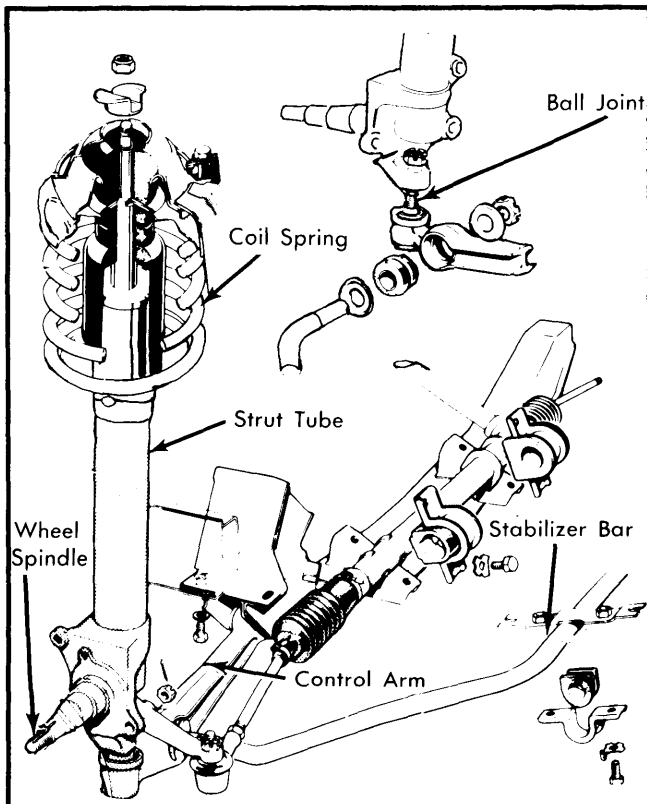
Front Suspension Assembly with Detail of Lower Ball Joint
